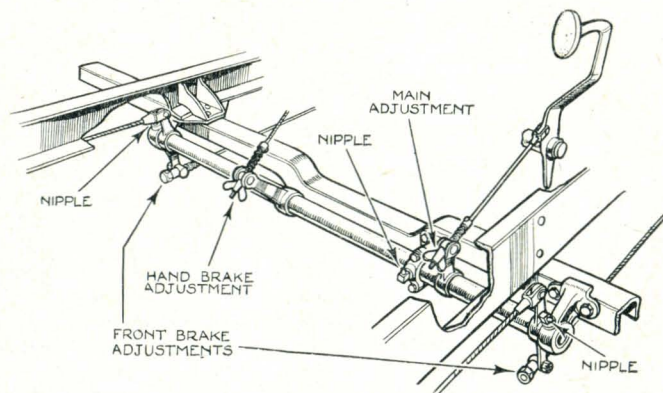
SHOWING THE BRAKE ADJUSTMENT ON THE CROSS-SHAFT AND THE LUBRICATION POINTS
